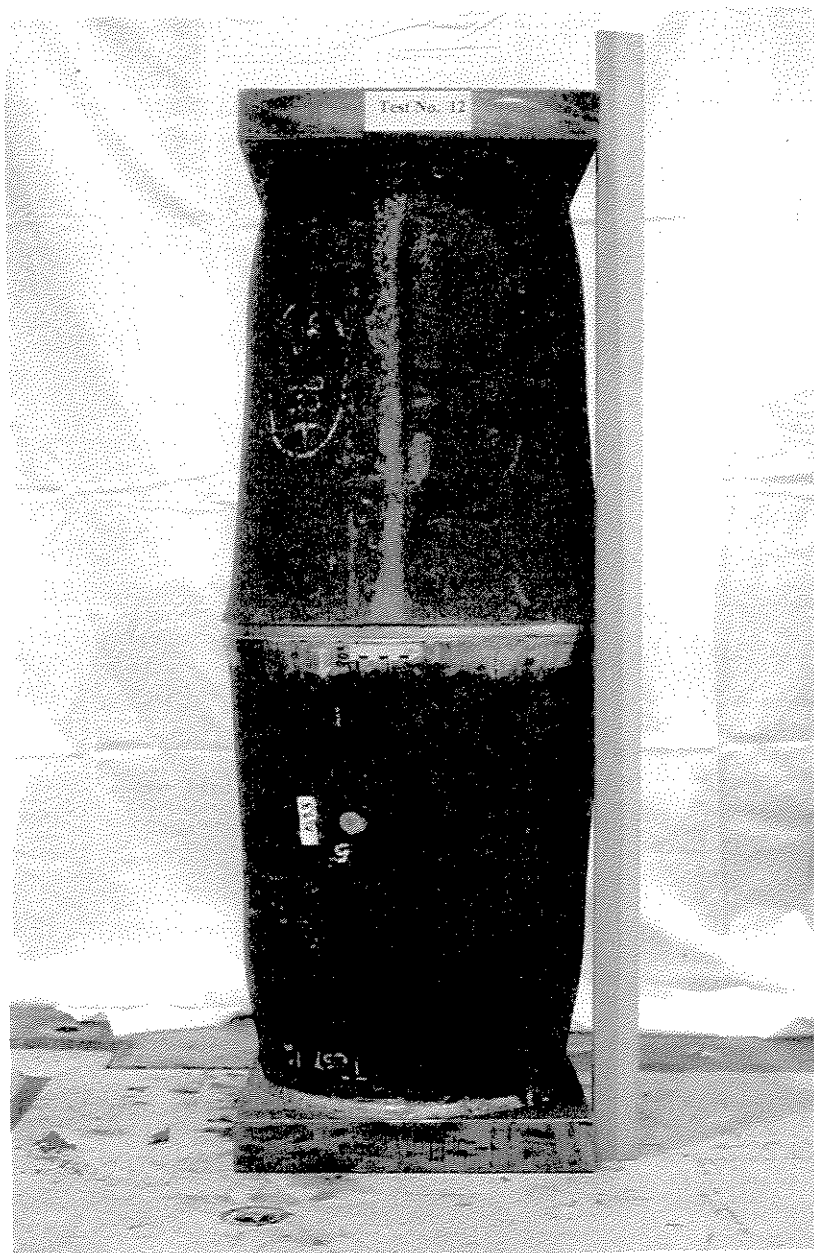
Picture of the test specimen no. 12 after the burst test
